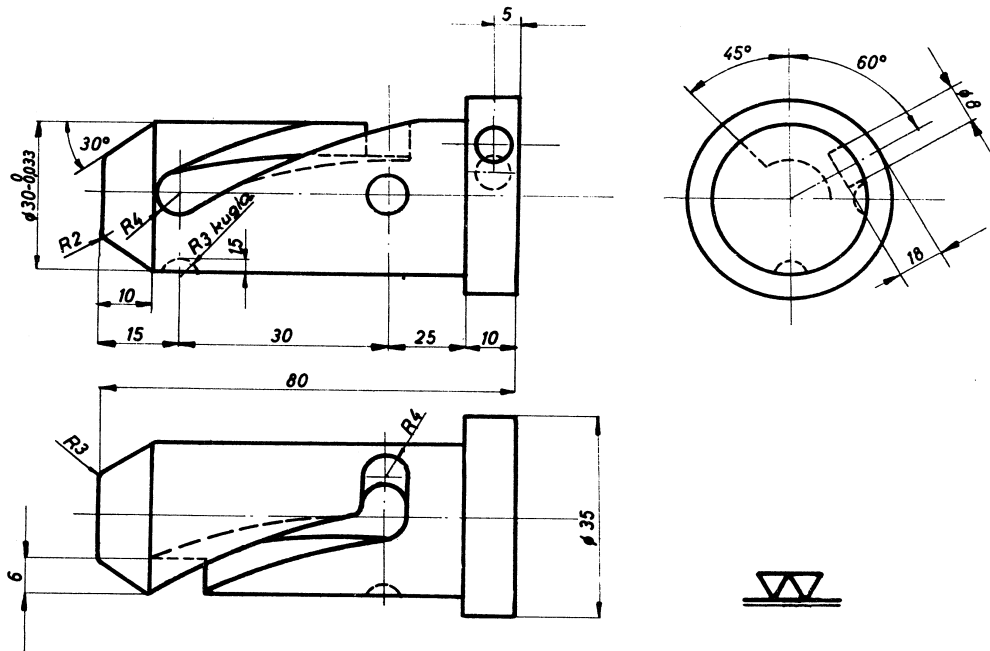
SPRING DEVICE DISCONNECTING BOLT — RIGHT
